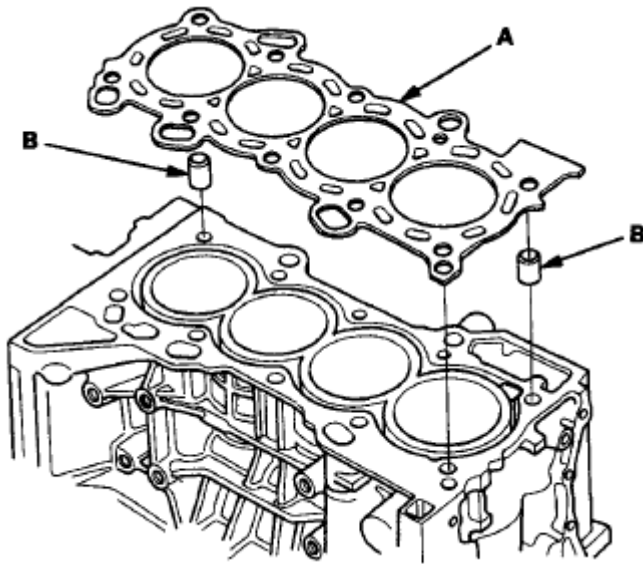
Identifying Cylinder Head Gasket And Dowel Pins
